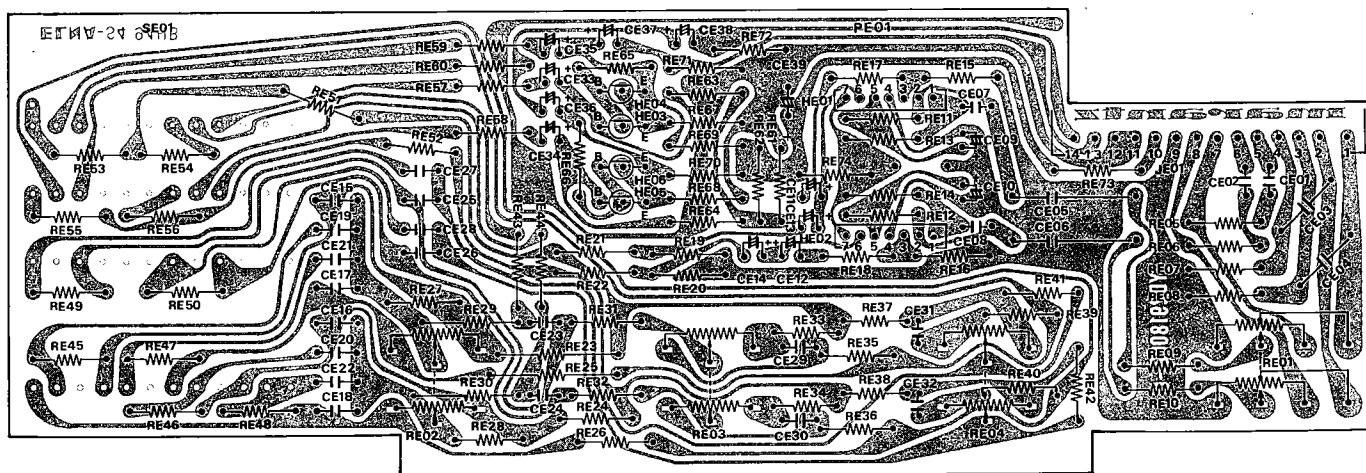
Pre and Tone Amplifier Assembly PE01 Component Locations
